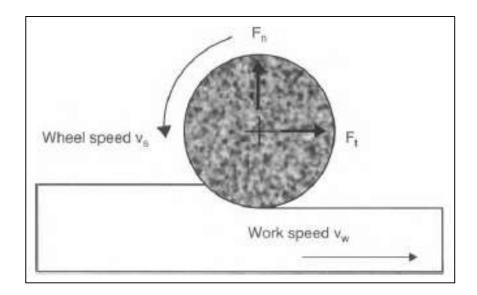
Material removal as workpiece the grinding wheel in down-cut grinding (Rowe, 2009).
